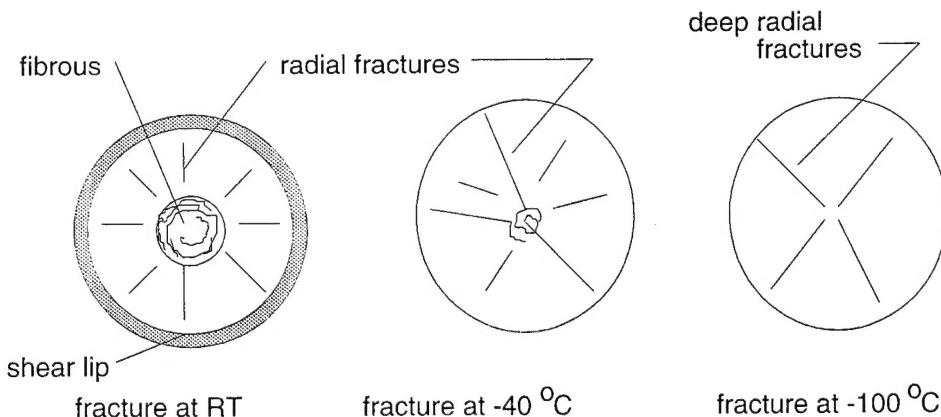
Fracture progression in plain tensile specimens, after Larson and Carr [2].
